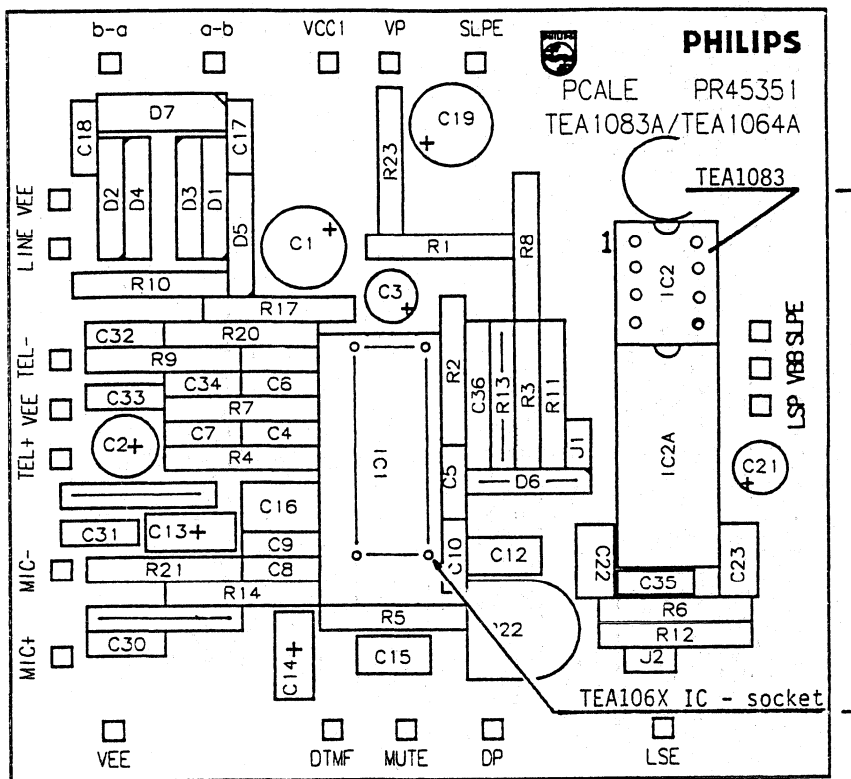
View of the components side of the PCB showing the mounting place of the TEA1083 and the shadow socket of the TEA106X.
